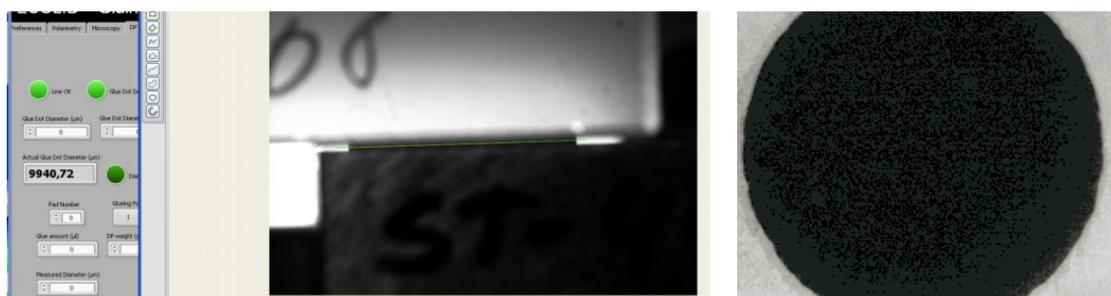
Edge detection during bonding process and detailed close-up inspection of a bonding pad
